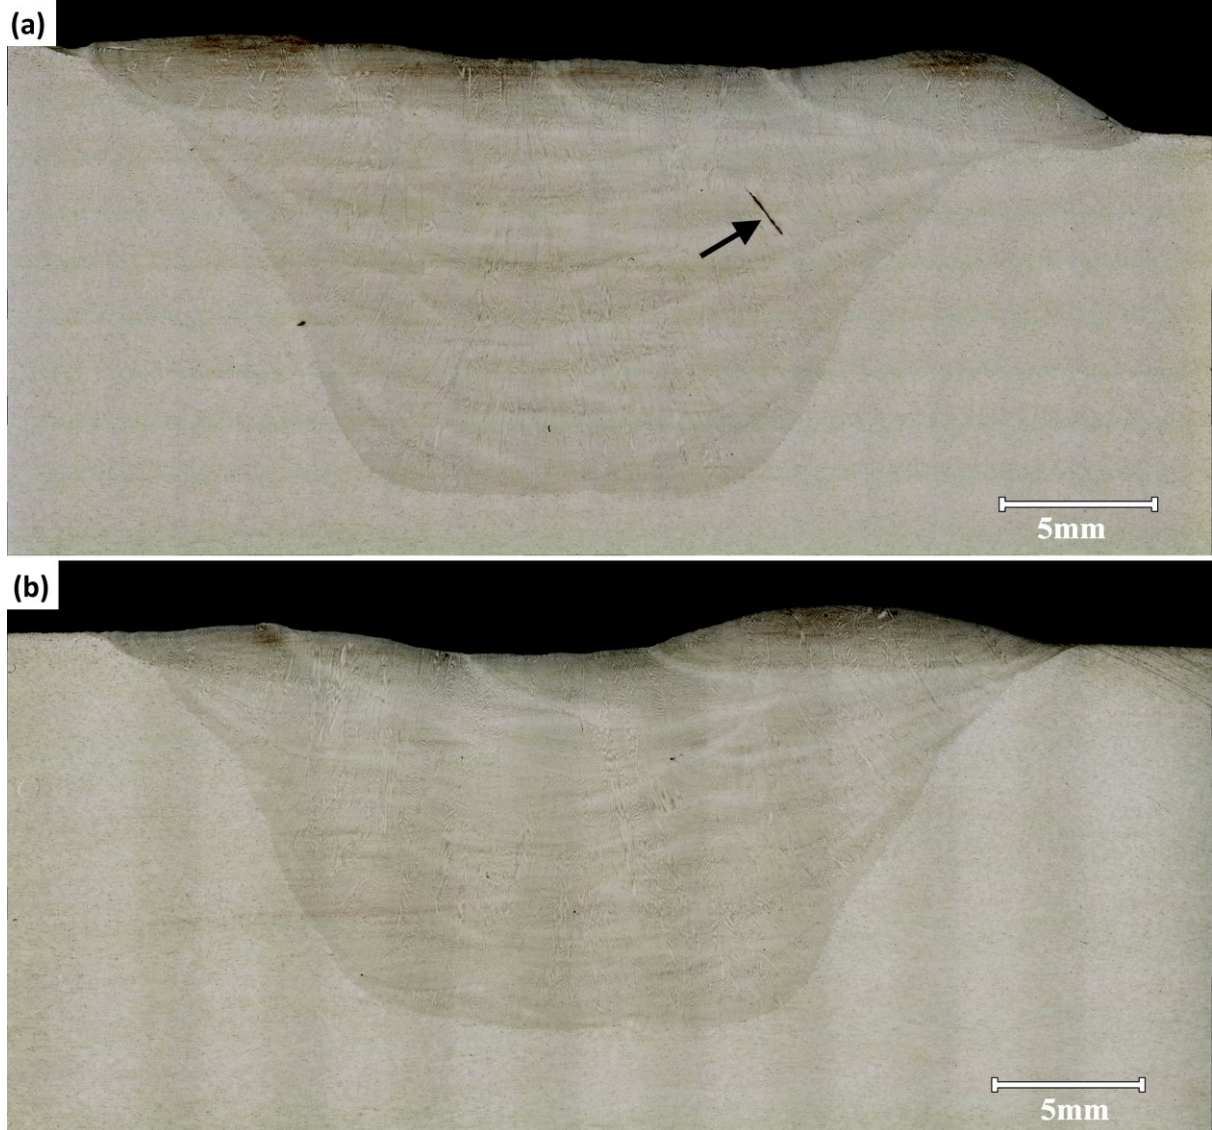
(a) Cross section of the hybrid weld using the star laser wobble pattern, travel speed of 508 mm/minute and laser power of 2 kW, and (b) cross section of the hybrid weld using the star laser wobble pattern, travel speed of 508 mm/minute and laser power of 3 kW. The arrow in (a) indicated a crack.
